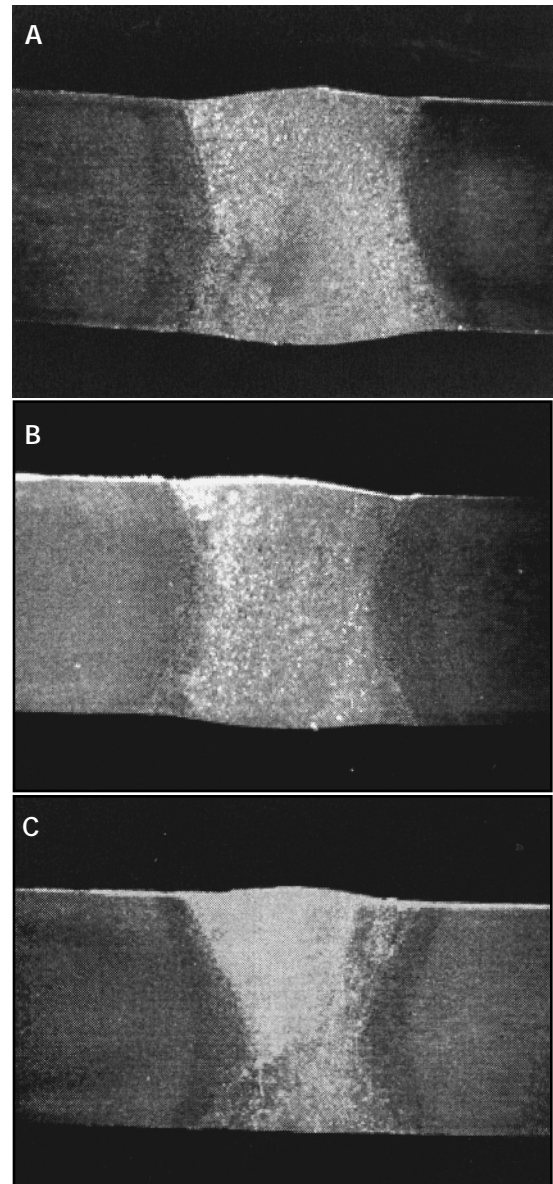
Cross-sectional photos of double-sided arc welds in butt joints. Thickness 6.4 mm, material 6061-T651, welding current 145 A, arc voltage 47 V. A — Welding speed 4.2 mm/s; B — welding speed 6 mm/s; C — welding speed 7.5 mm/s.
